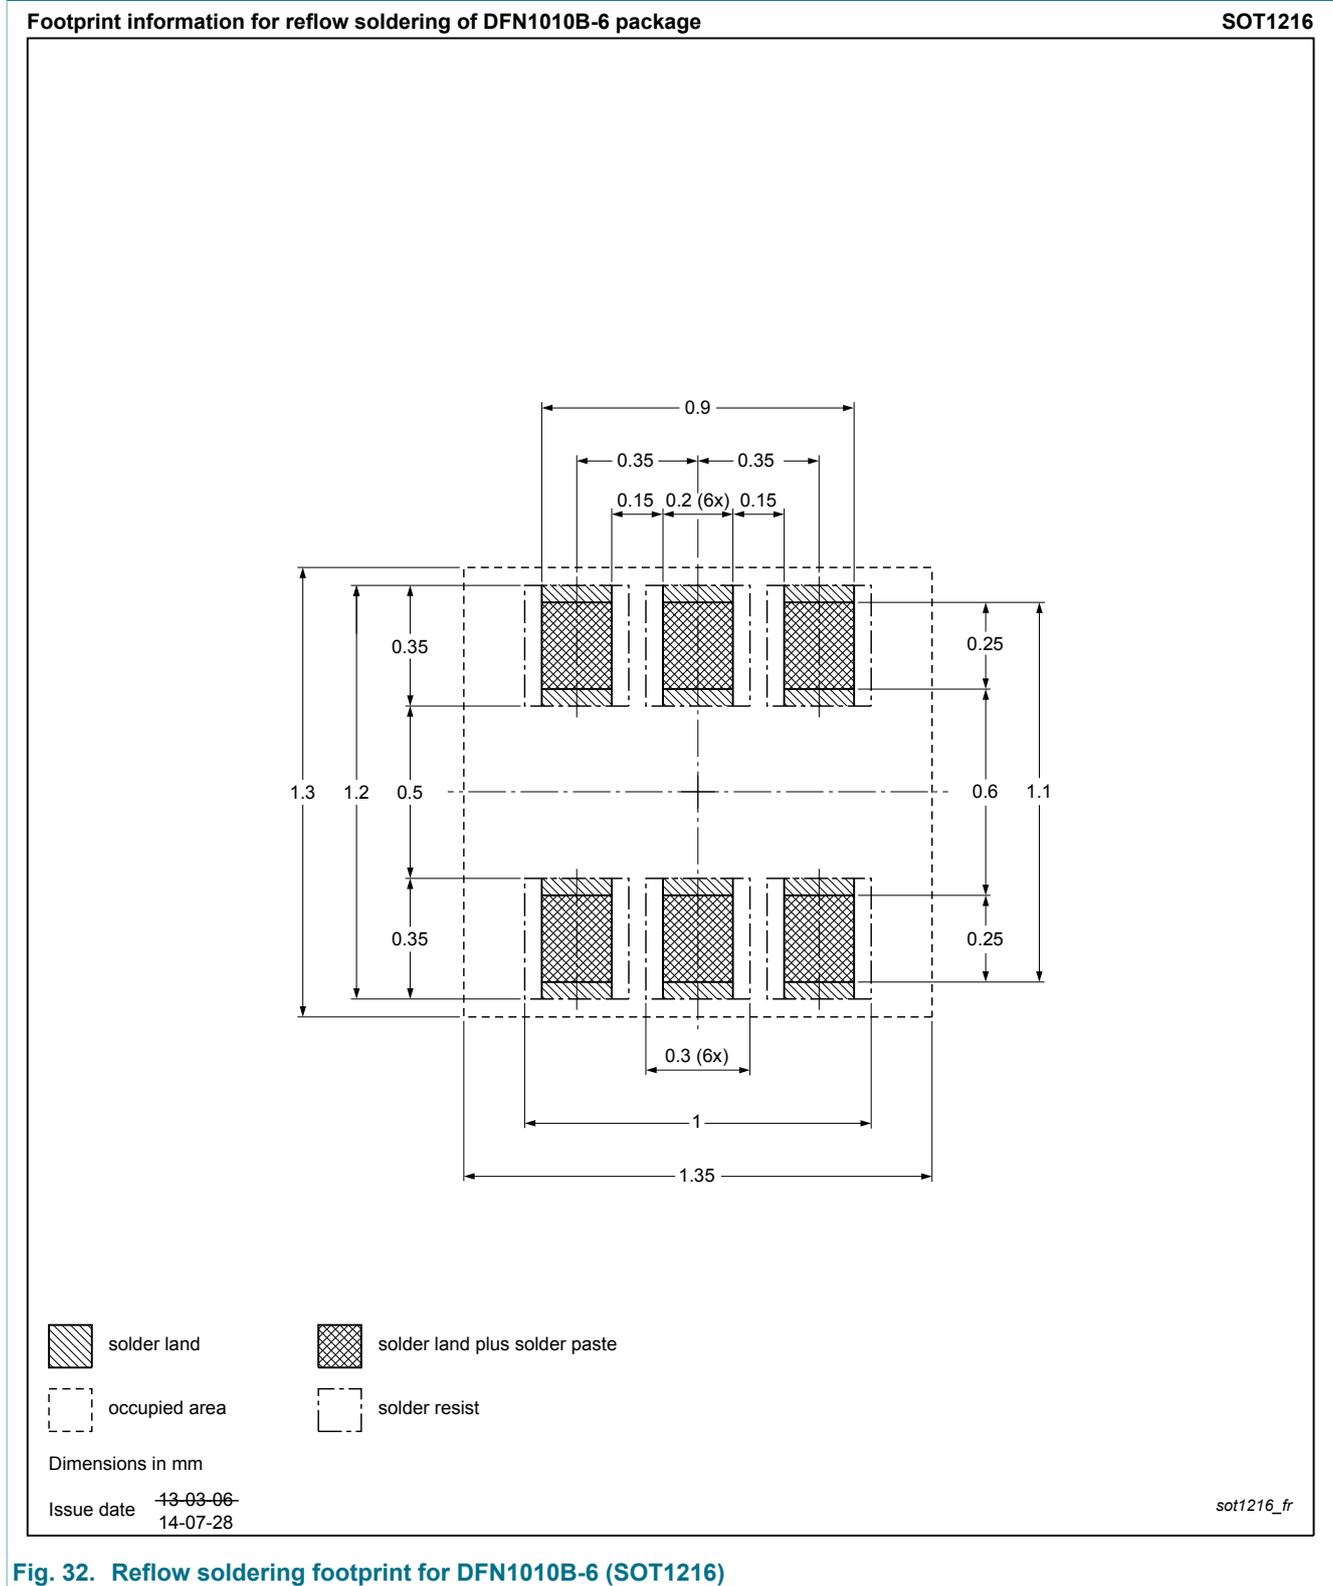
Reflow soldering footprint for DFN1010B-6 (SOT1216)
